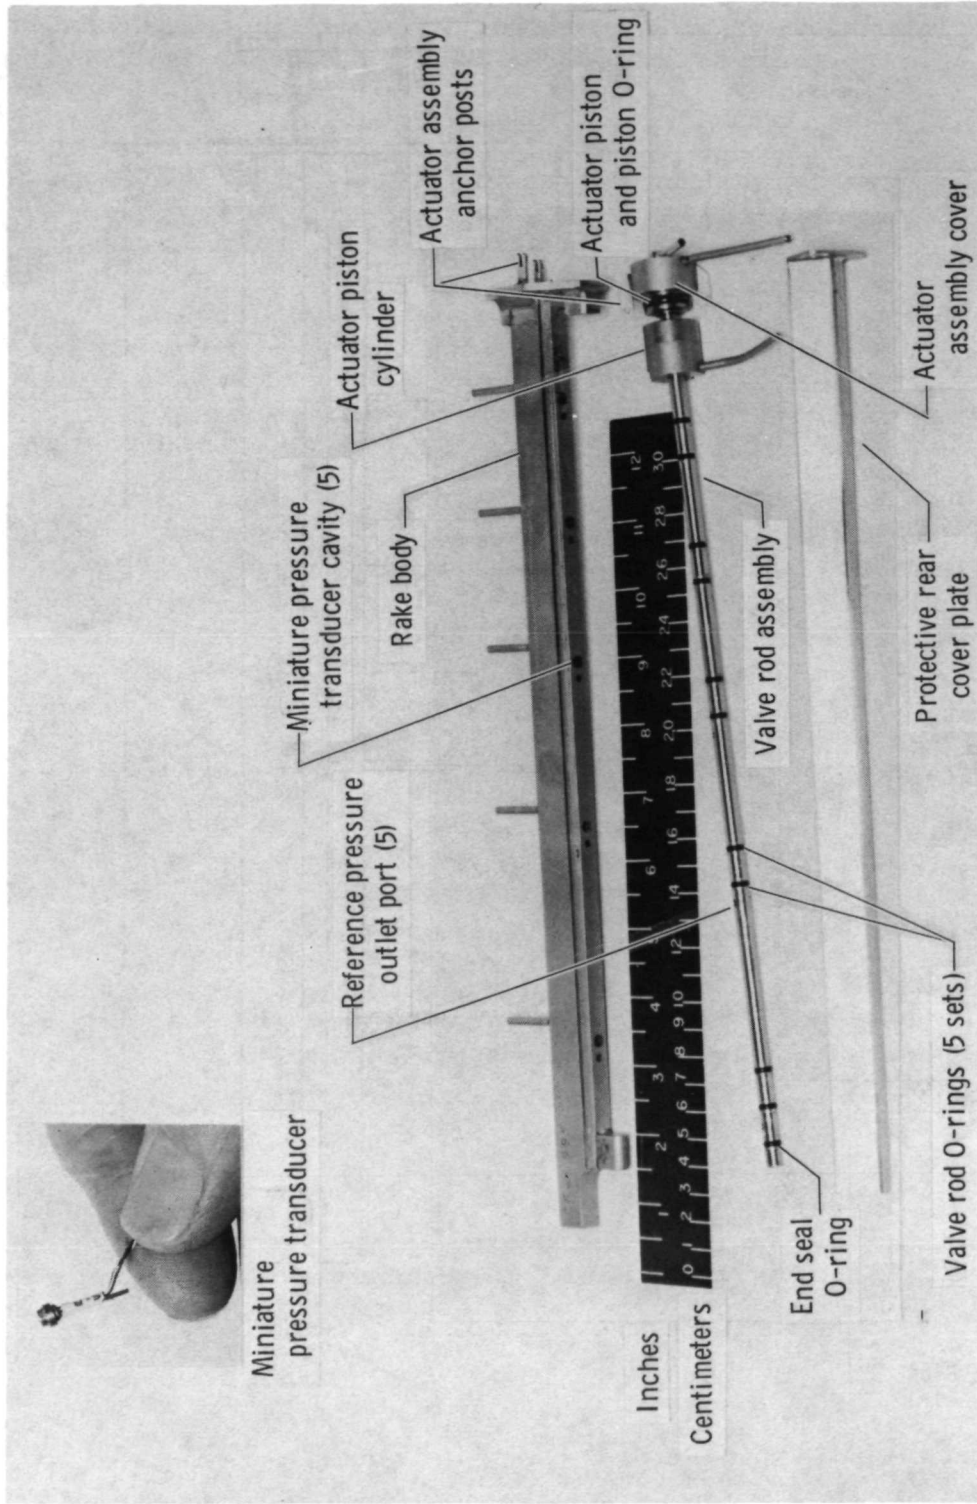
Partially disassembled nullable compressor-face rake showing details of the internal configuration.
